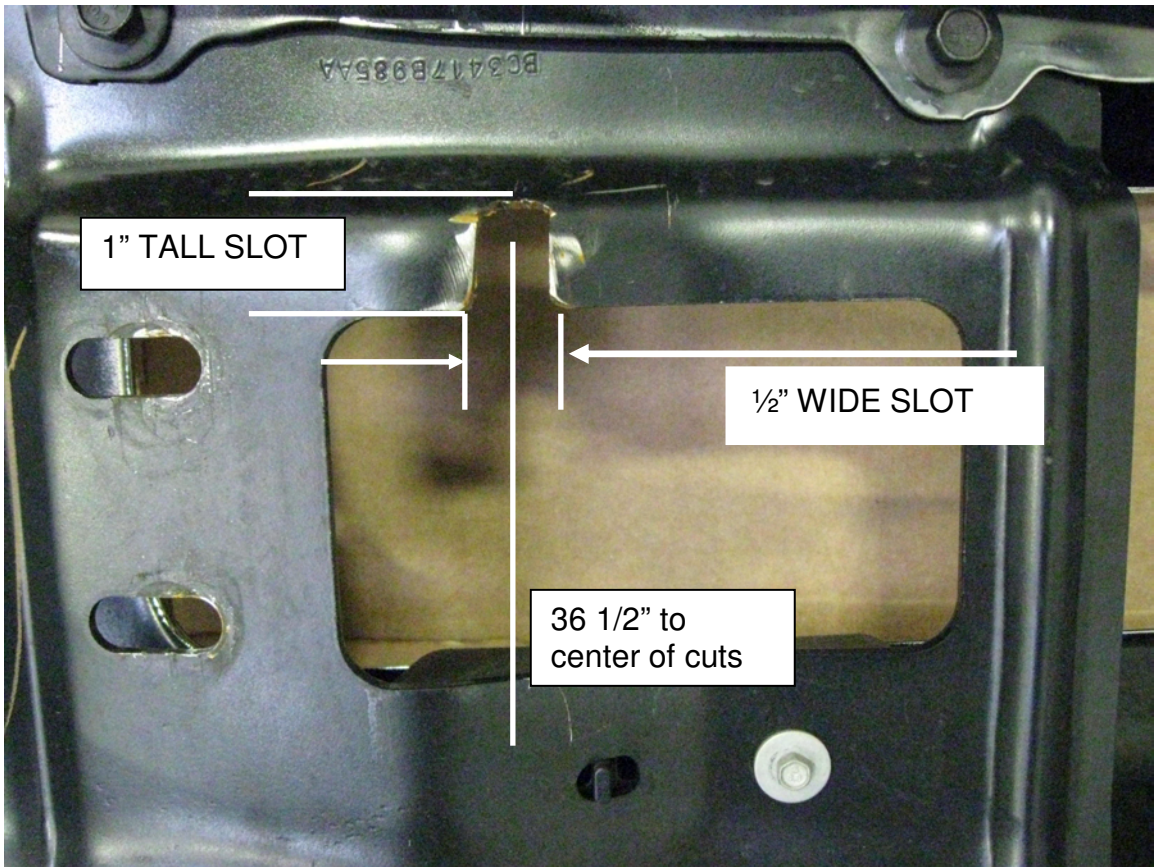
Driver's Side Shown. Cut slots in bumper brackets
